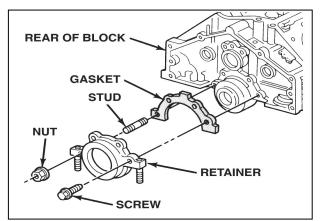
Removing Crankshaft Rear Oil Seal Housing
